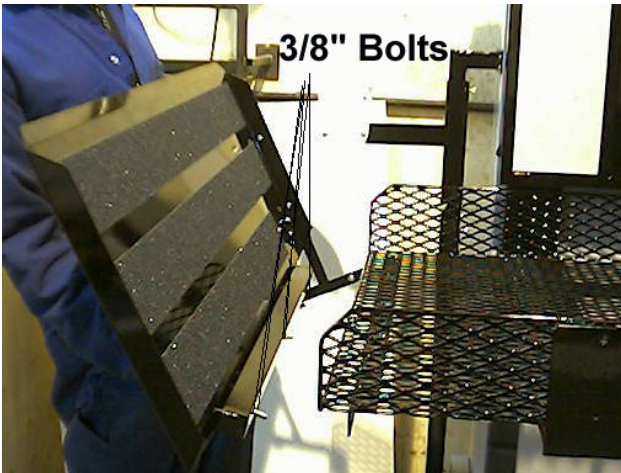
MOUNT UPPER TOE PLATE TO CARRIAGE
